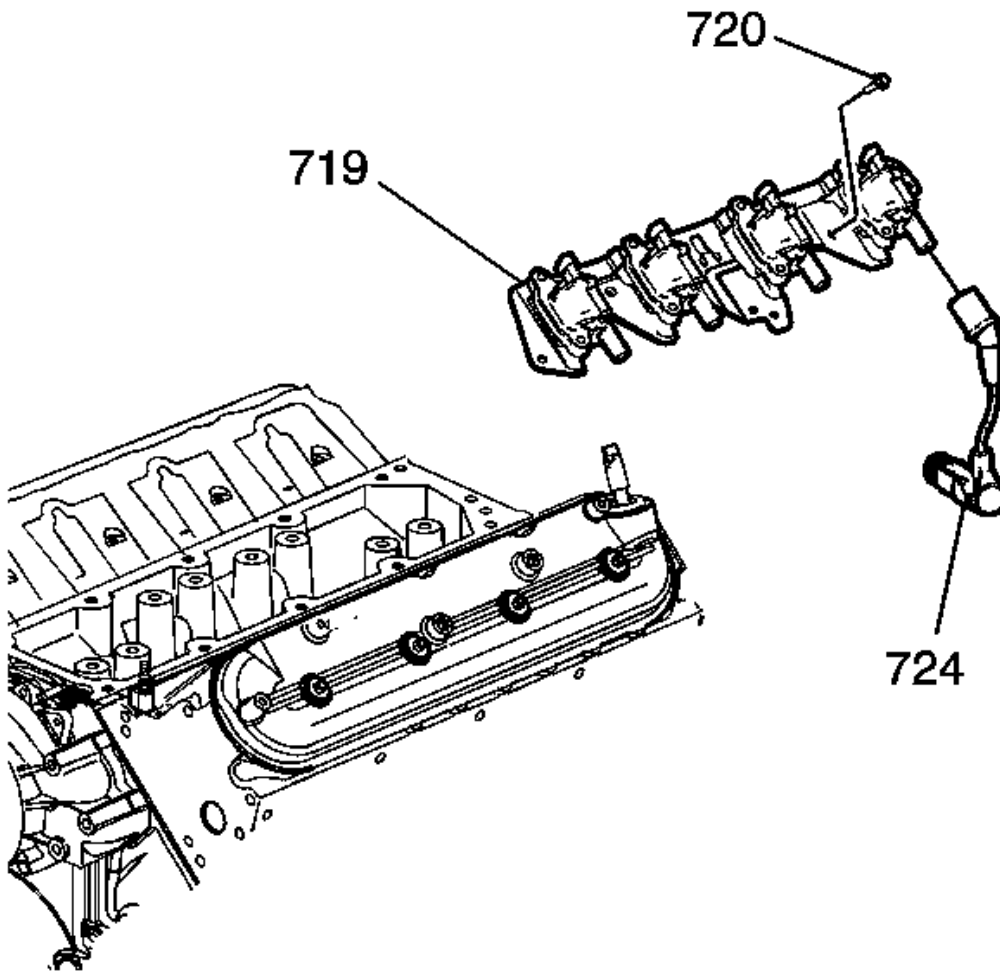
Identifying Valve Rocker Arm Cover Attachments
